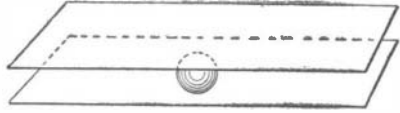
IDEAL BALL BEARING—FRICTIONLESS.
